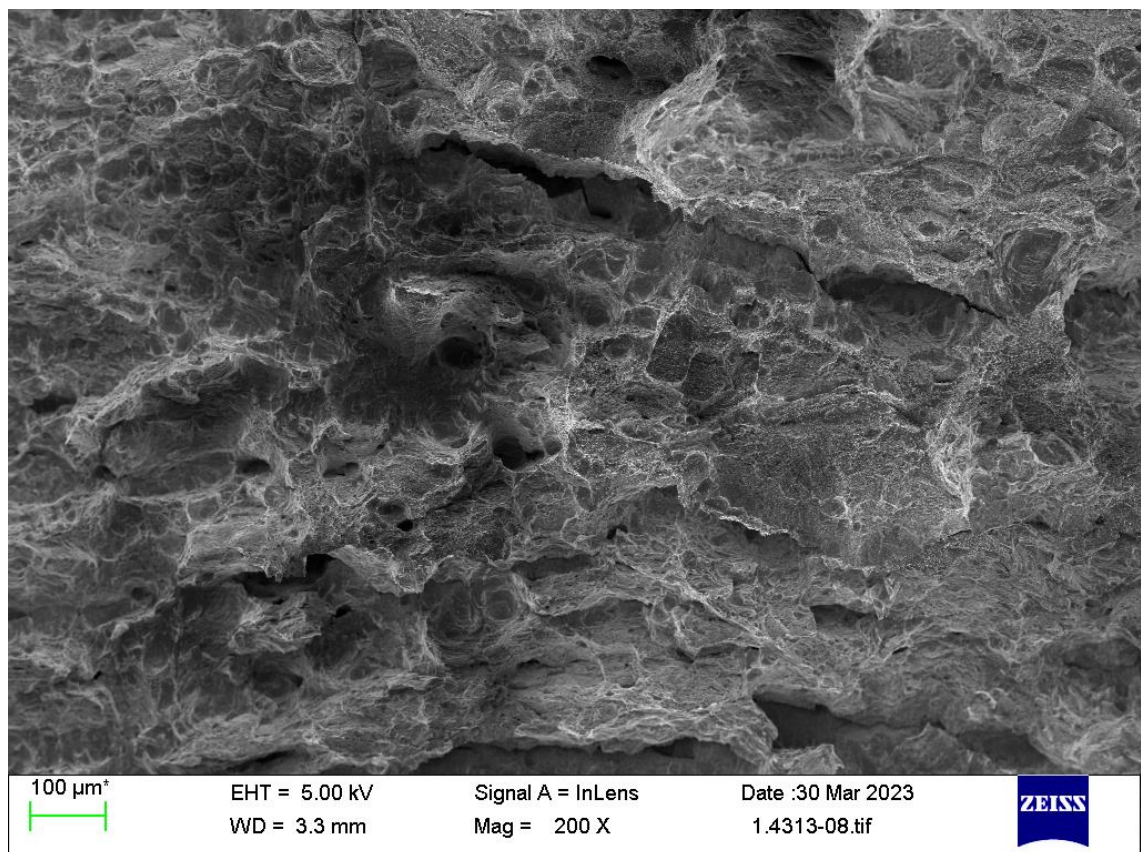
Overview of the fracture surface in martensitic stainless steel.
